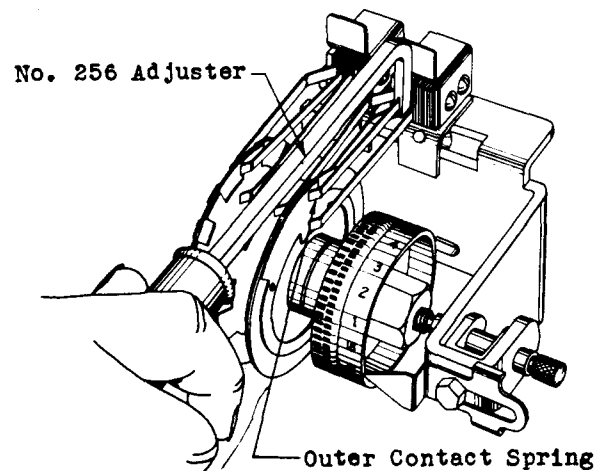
Method of Using the No. 256 Adjuster in Adjusting Outer Contact Springs
